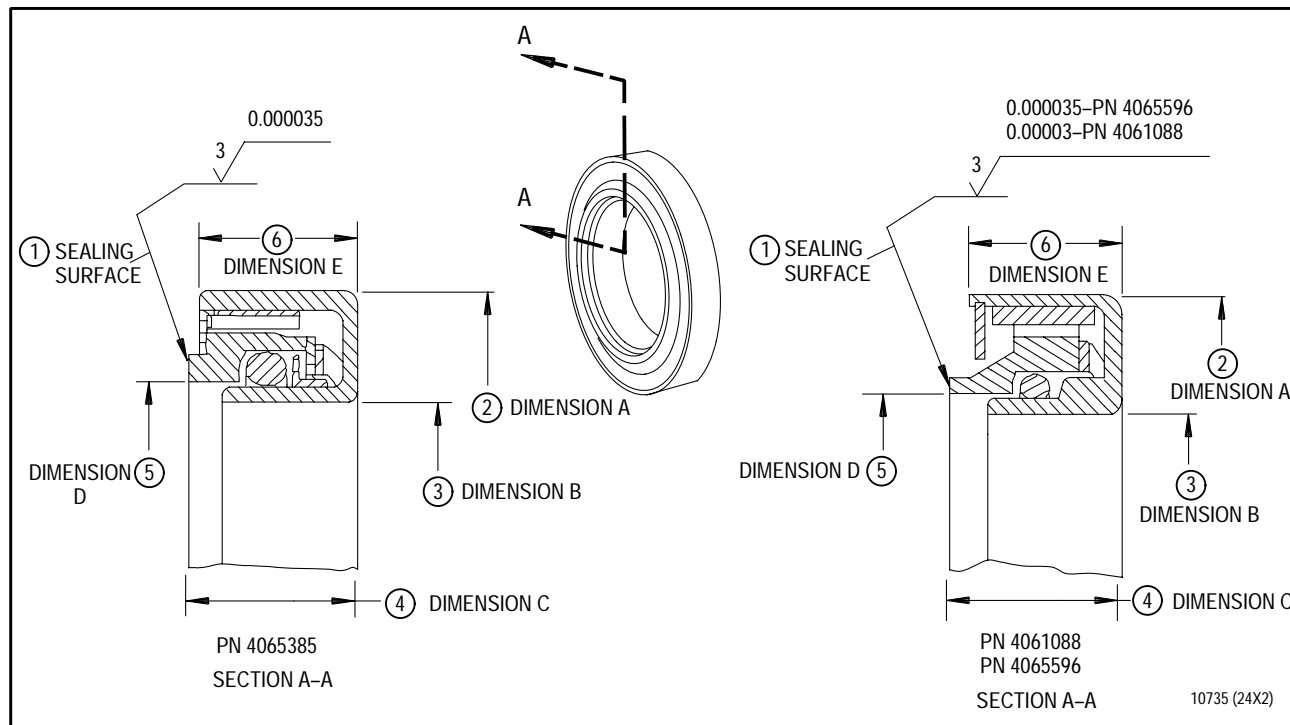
Seal Assembly, Reduction Gearbox (PN 4065385, 4061088 and 4065596) - Inspection
